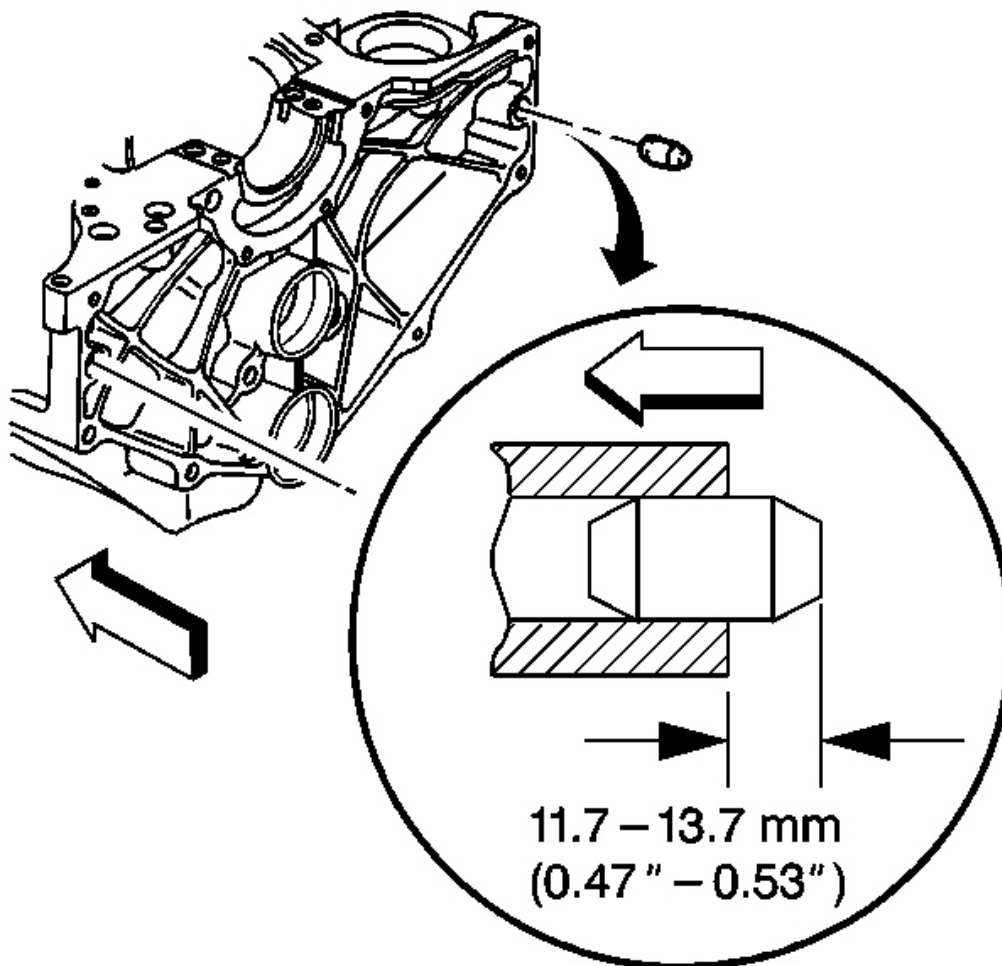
Installing Transmission Locator Dowel Straight Pins
